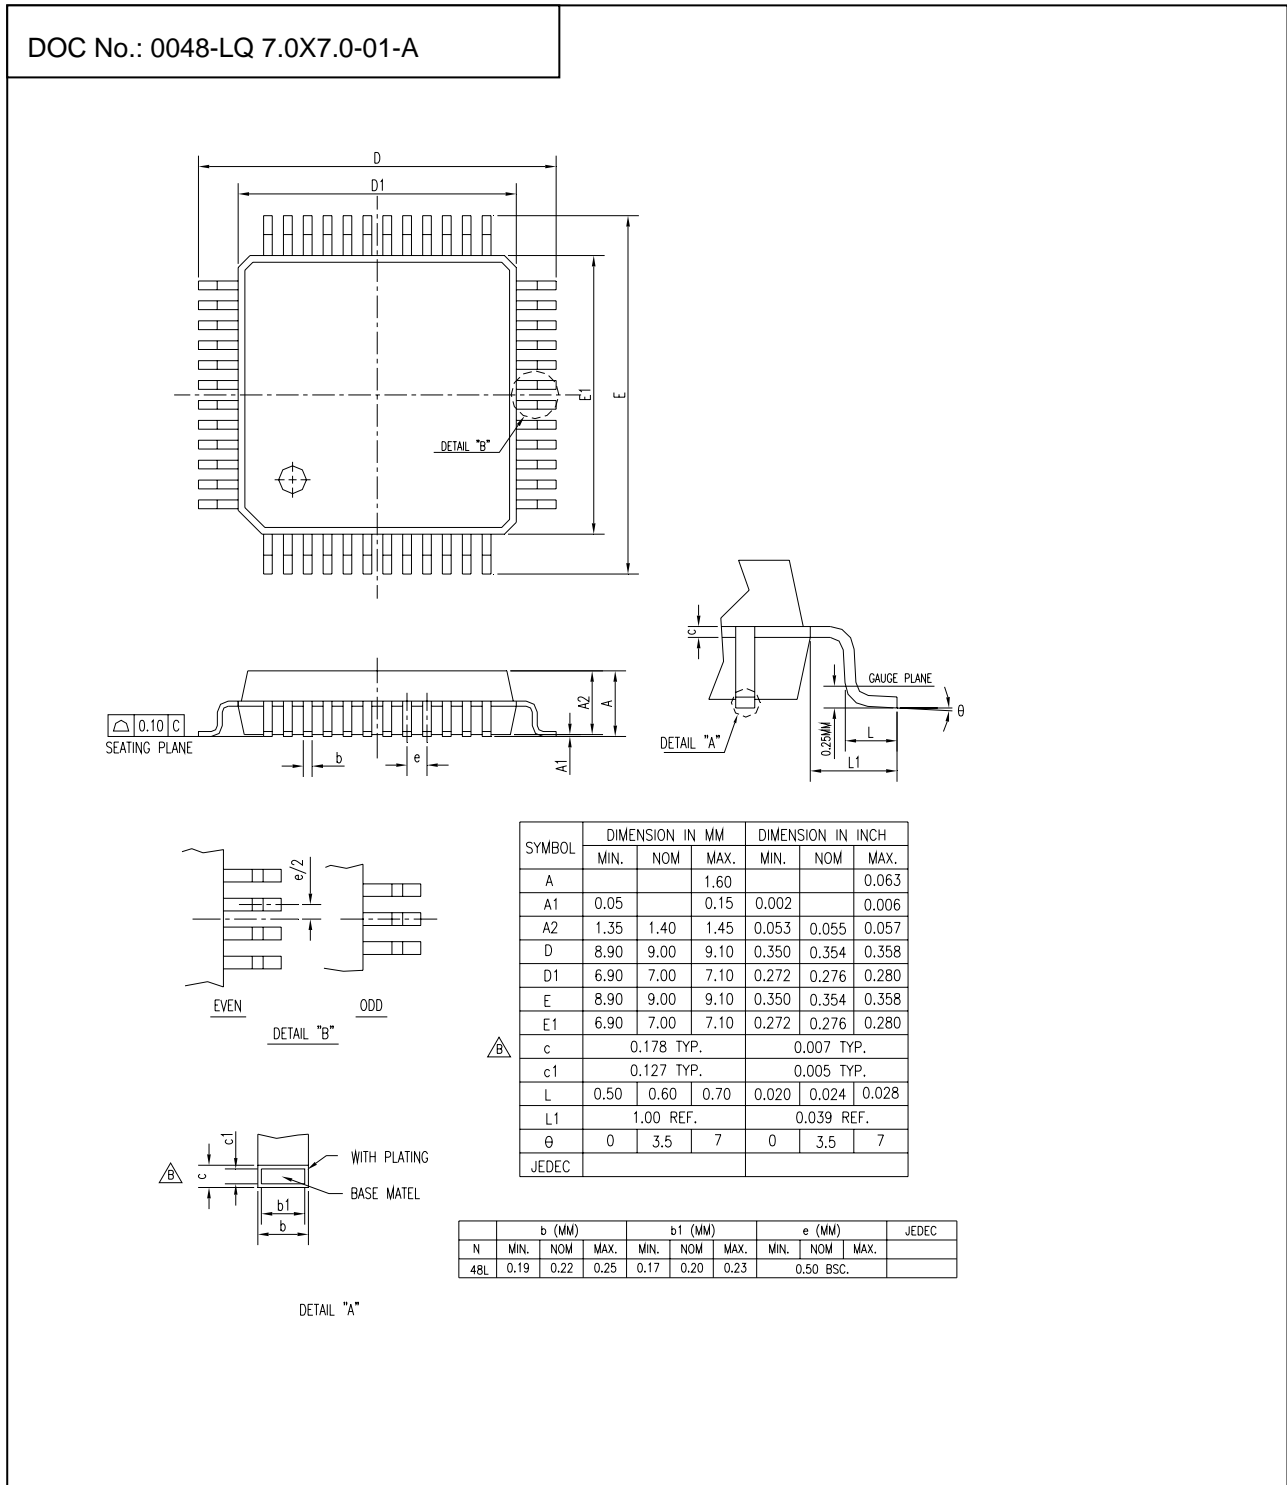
48 Pin LQFP 7.0x7.0x1.4 mm Package Outline Dimension
